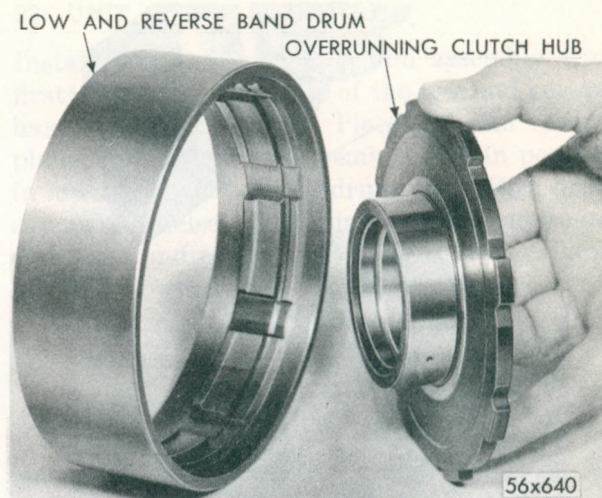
Removal and Installation of Overrunning Clutch Hub in Low and Reverse Band Drum
